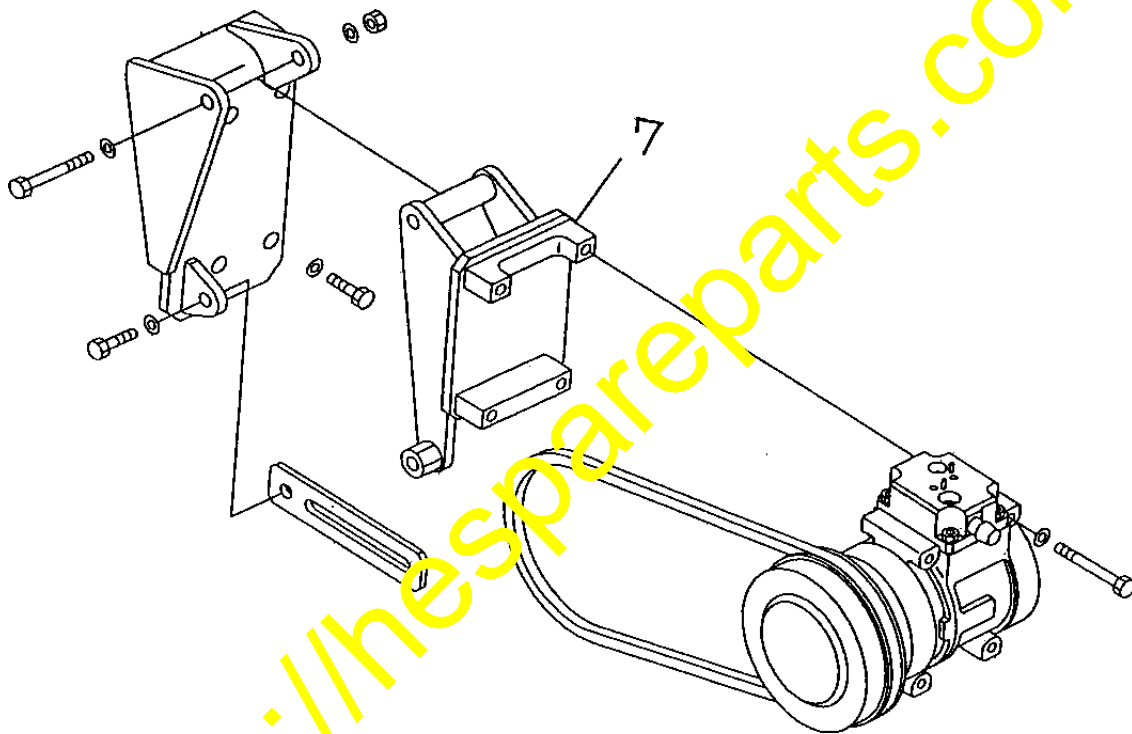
Removing the current air compressor mounting bracket 7 of the air conditioning system.
